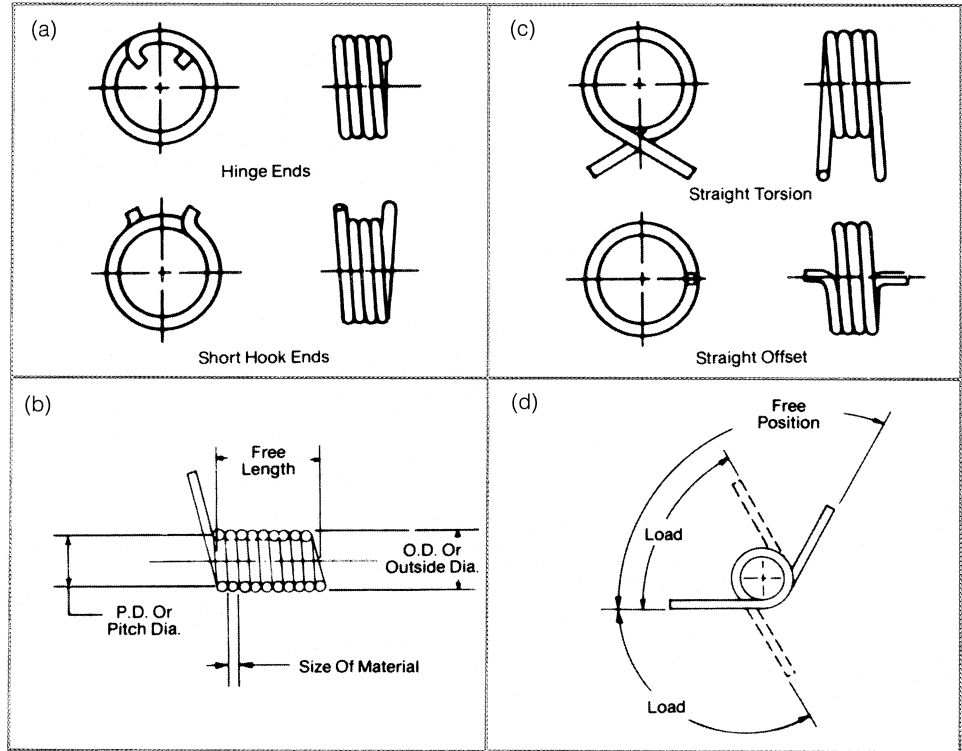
Drawing Requirements for Helical Torsion Springs
